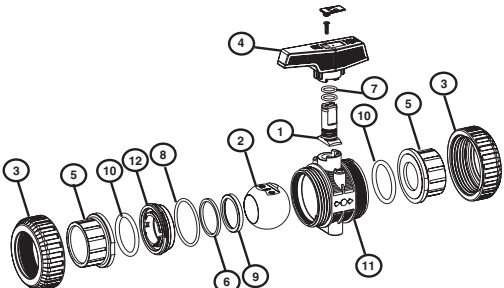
FIG.	Parts	Plèces	Despiece	Parti	Bauteile	Peças	Material
